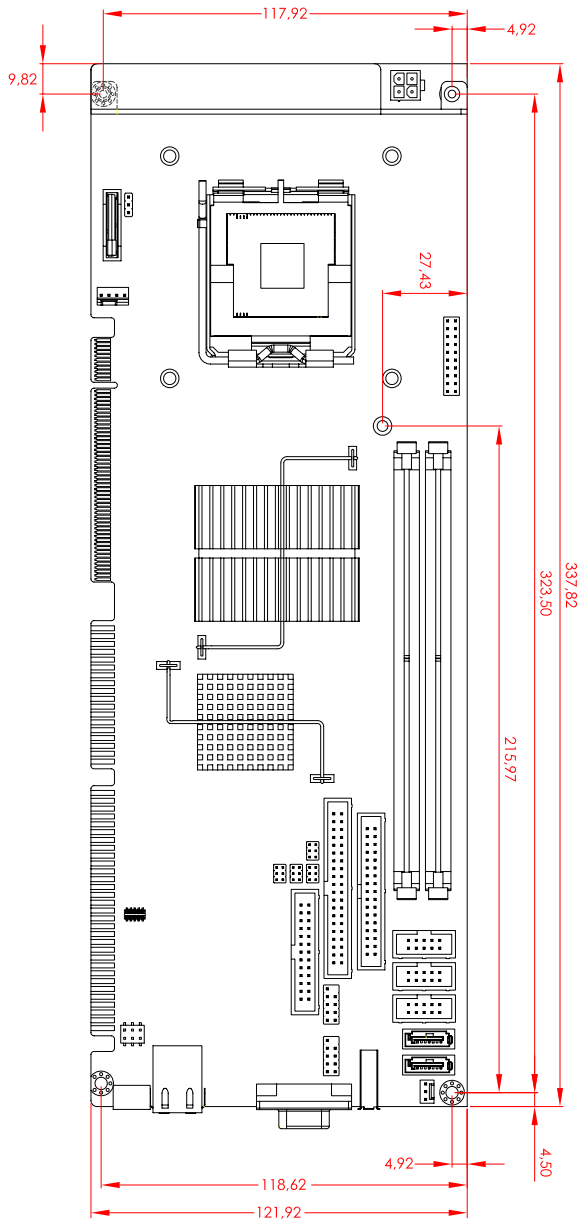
NuPRO-935A Board Dimensions (top view)
